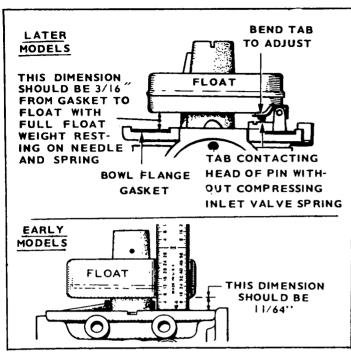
CARBURETOR FLOAT ADJUSTMENT
